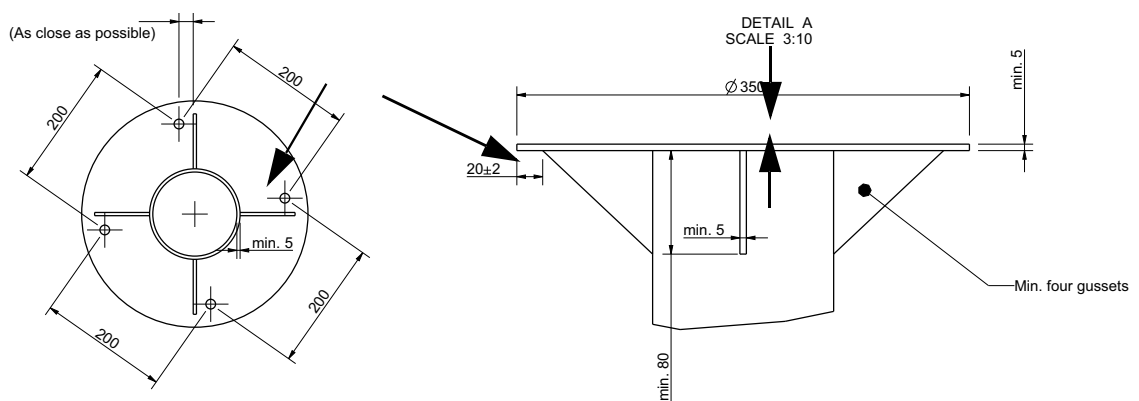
ADU mast flange, top and side view (S600 antenna)
